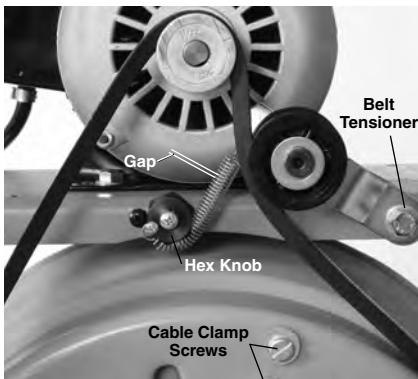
Torque Limiter Adjustment. (Shown With Belt Guard Removed)
